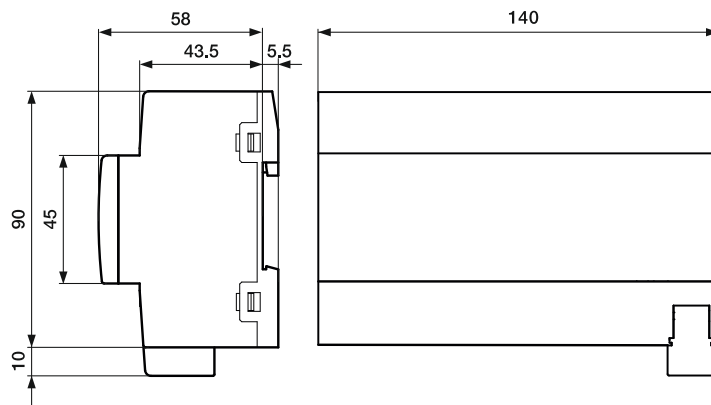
Dimensions of 8-fold blind actuator MDRC (specifications in mm)
